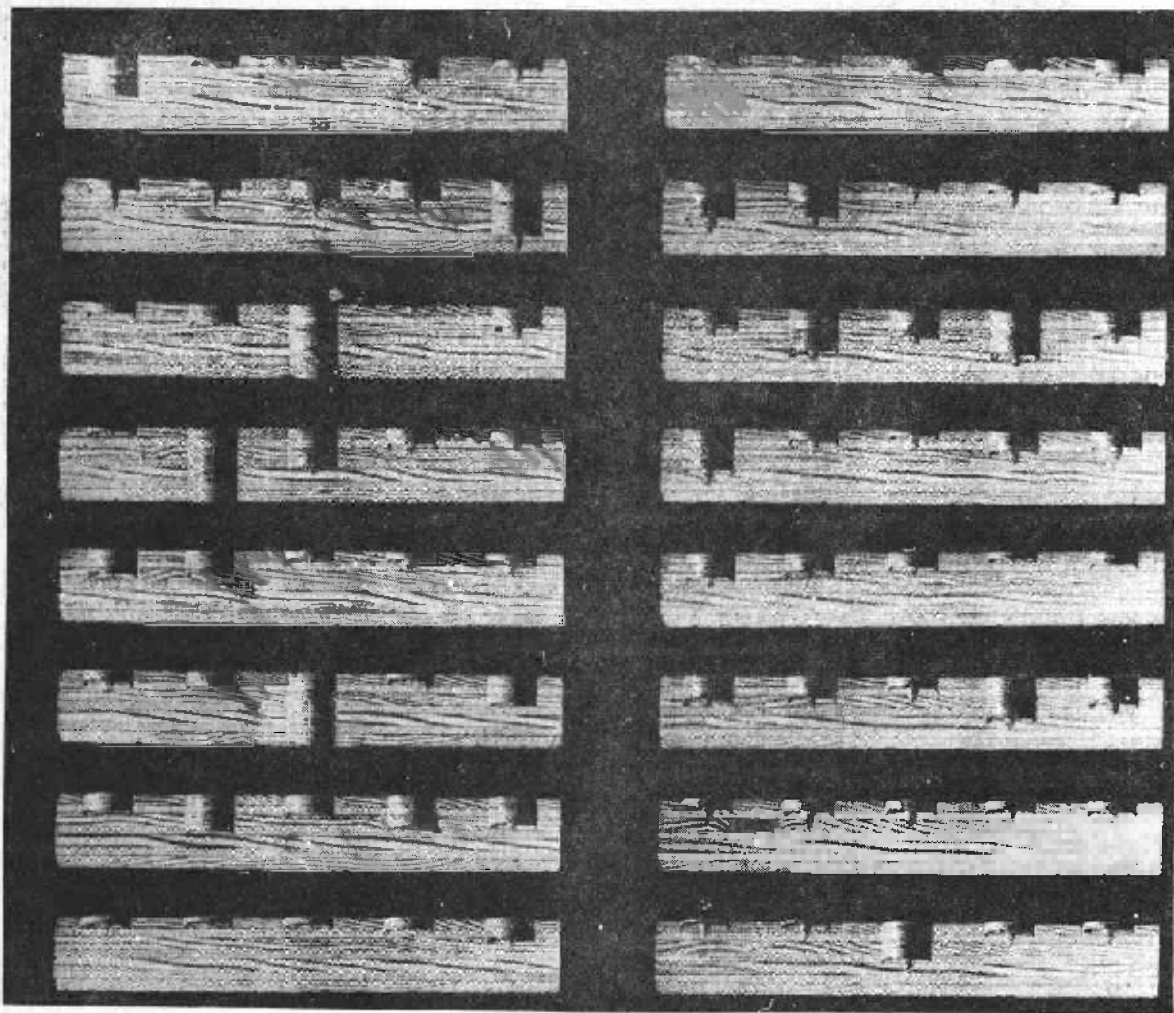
Location at which chips wedged on cutting edges of machine bit while drilling a 1/2-inch hole in 7-ply, 3/4-inch Douglas-fir plywood at 800 revolutions per minute.
